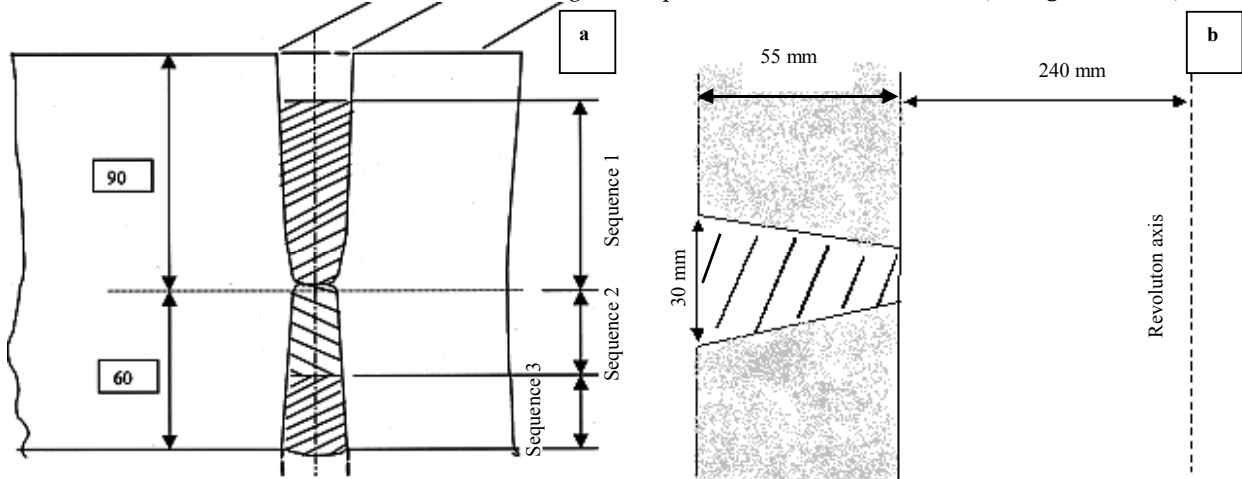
Geometry of WJT91 (a) and WJP91 (b) weldments
